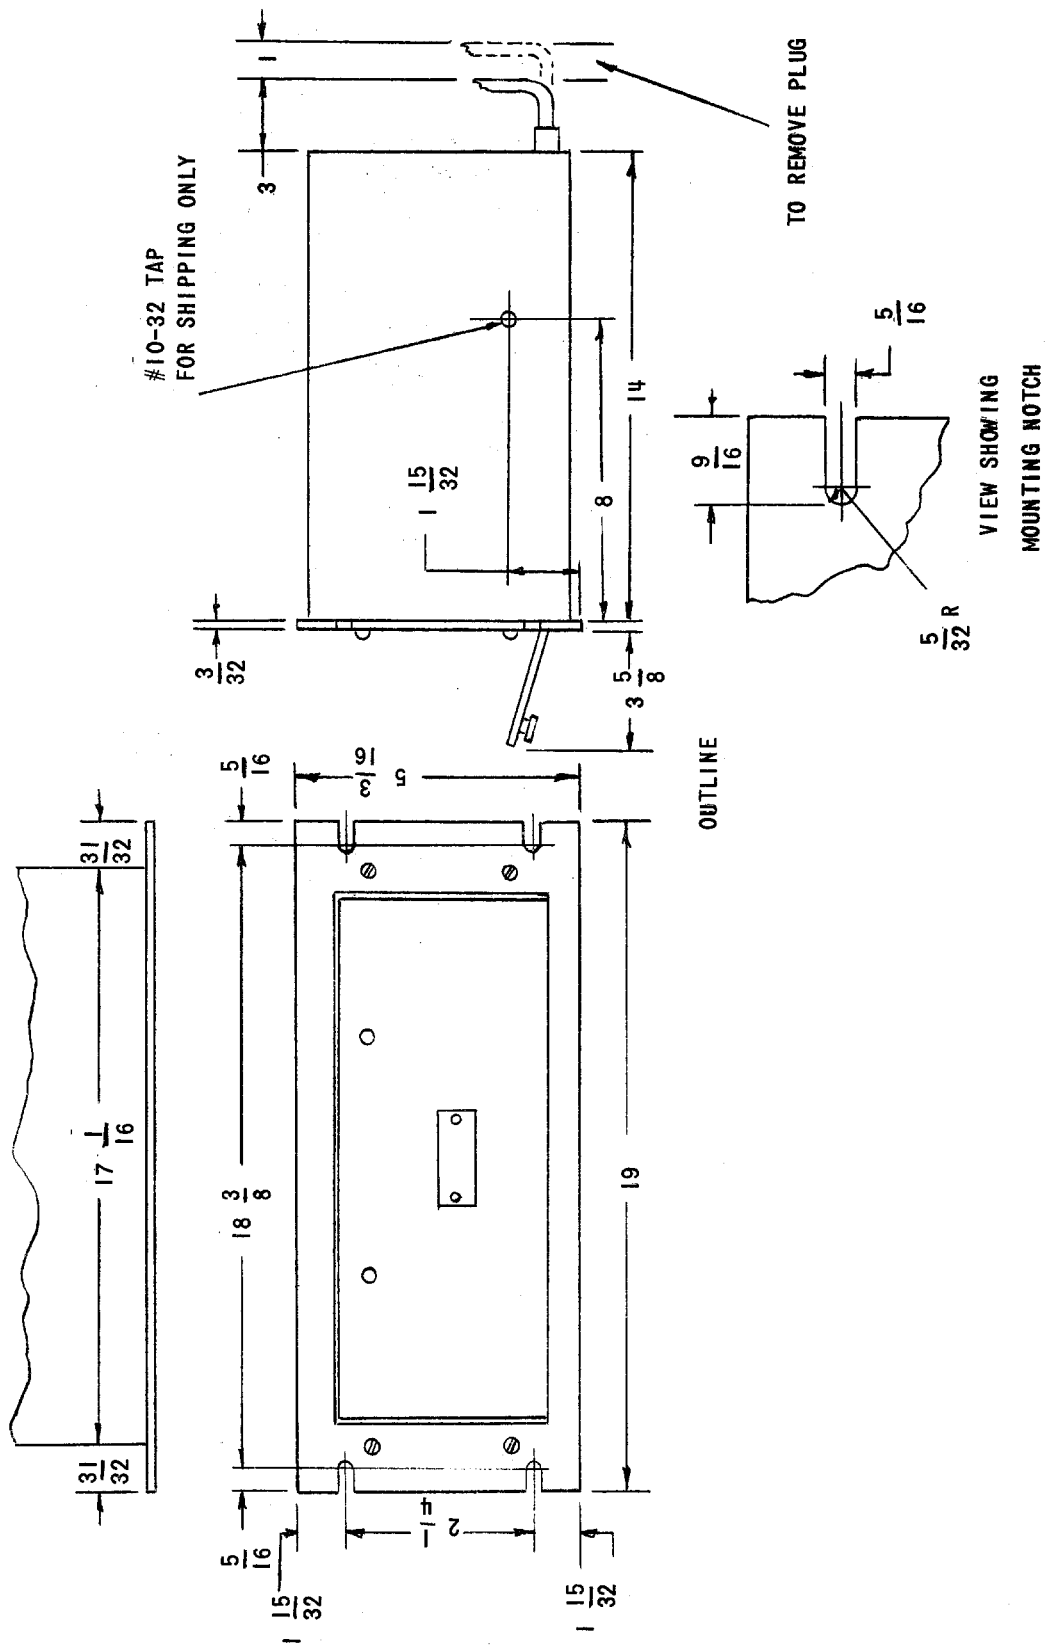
(0165A7754-1) Outline And Mounting Dimensions For The SLD42H4 Network Unit.
